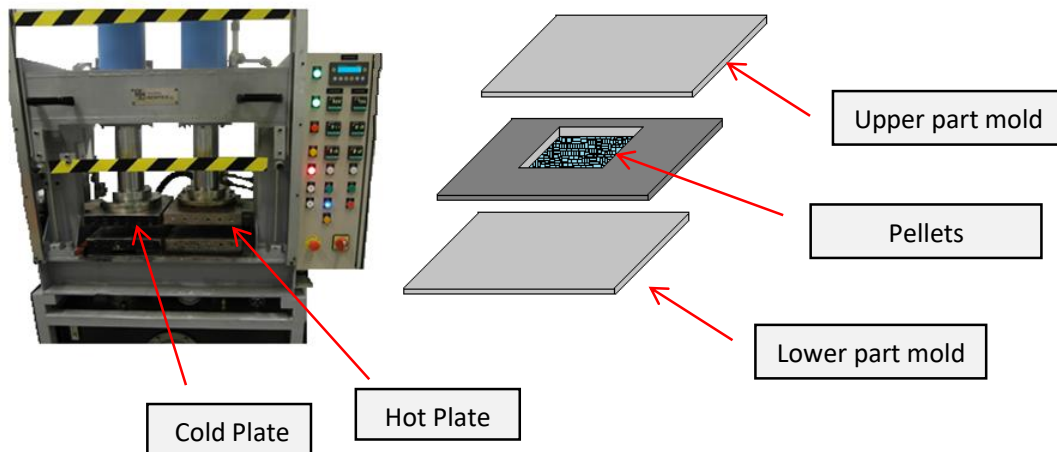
Image of the hot-cold plate press. Schematic design of the mold.
